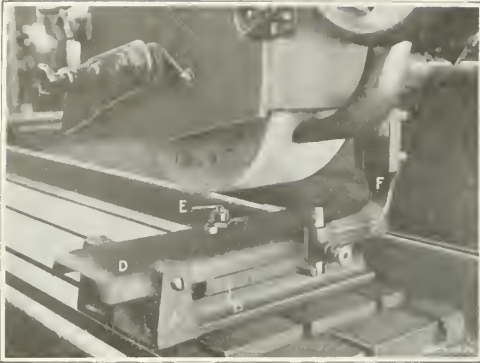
Device for truing Face of Wheel to Irregular Form on Norton Surface Grinding Machine
